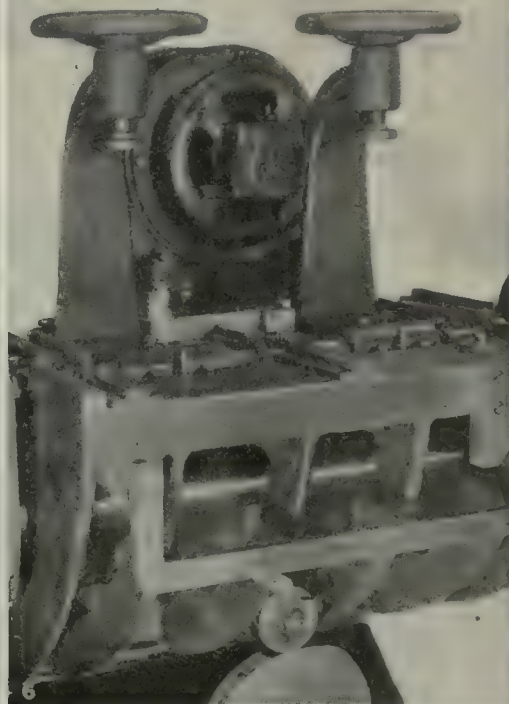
A double-spindle Colburn heavy-duty drilling machine drilling and reaming steering knuckles. The knuckles are held in spring-controlled drilling fixtures which allow of easy handling, as it is only necessary to raise the upper bar, remove the drilled piece and put a new one in place. Hole is ¾ in. by 5 in. deep. Production 24 per hour.
